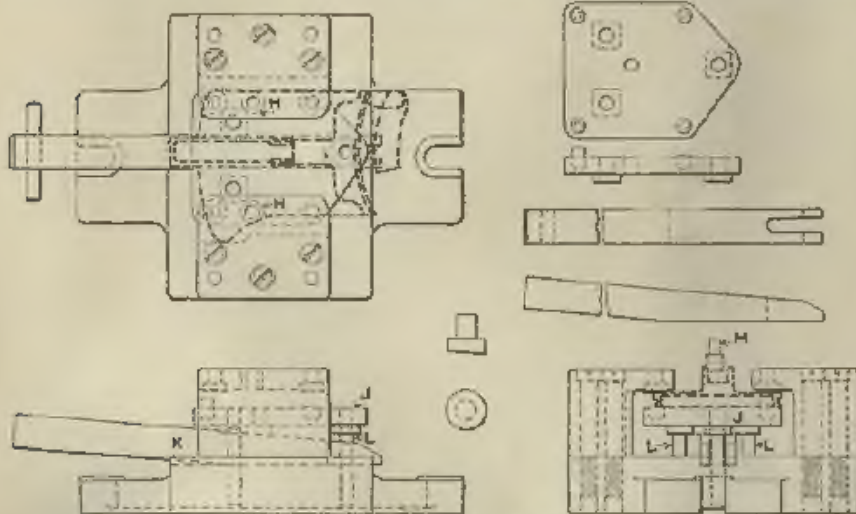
PROFILING FIXTURE FOR SIGHT-ELEVATING SIDE CLEARANCE
